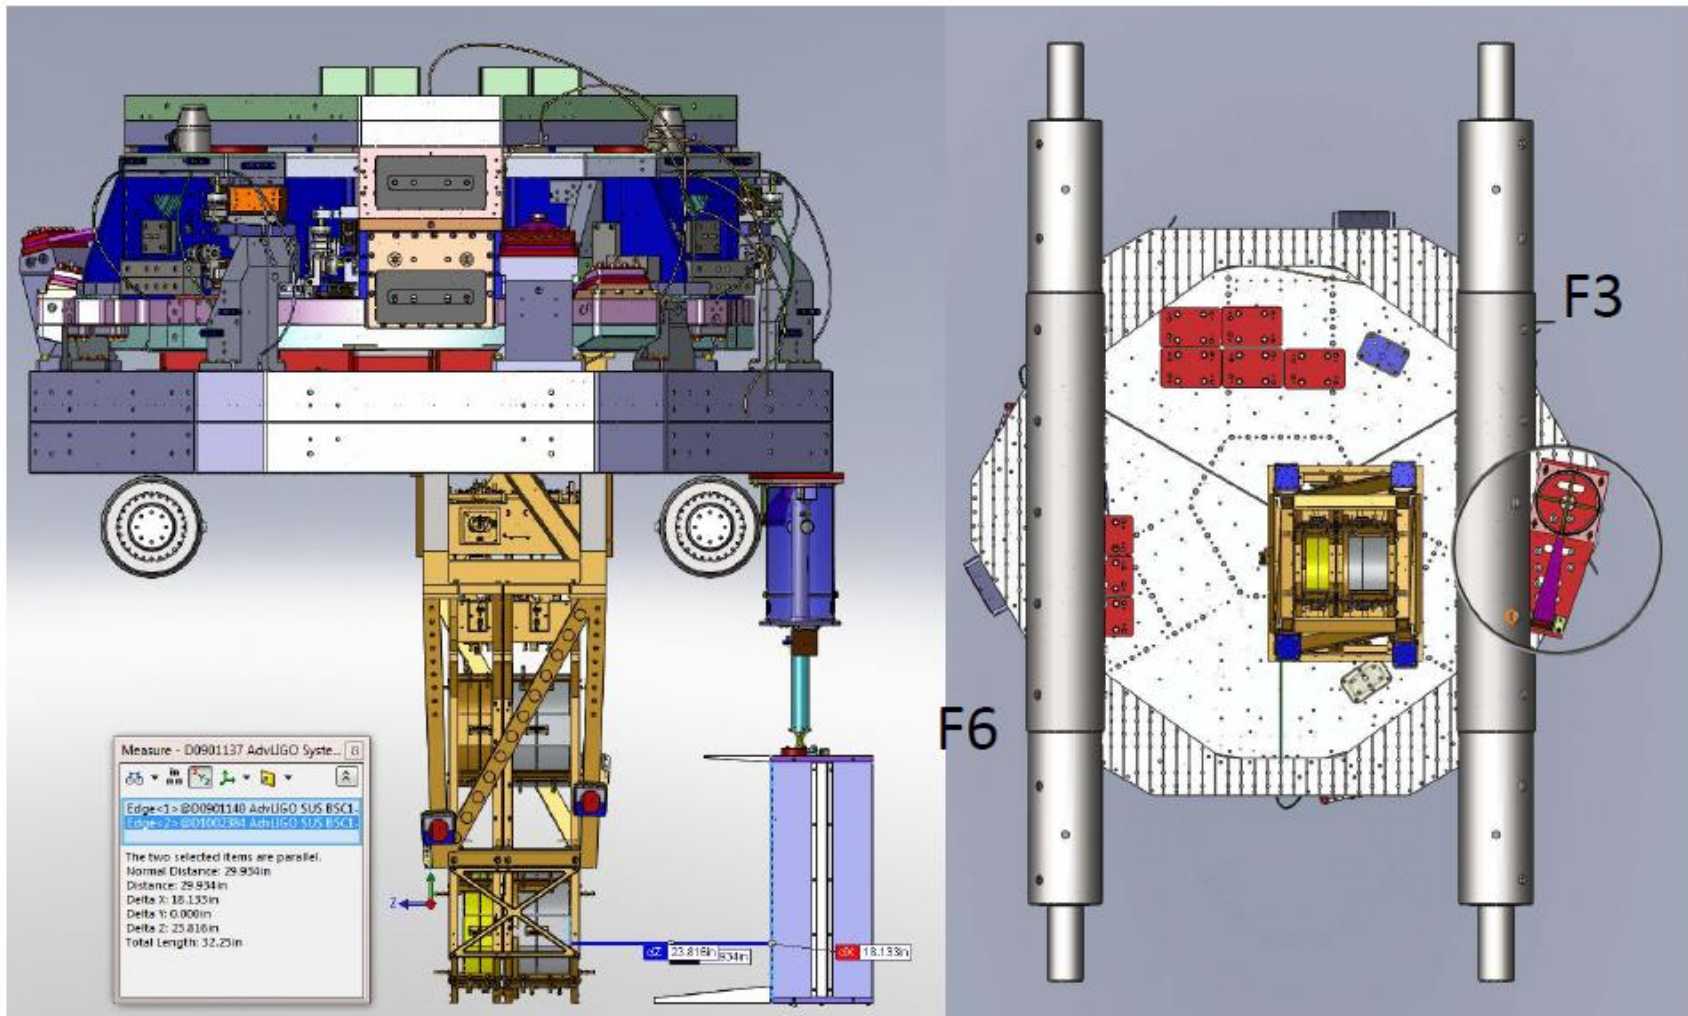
Clamping Detail for the ACB Top Mounting Plate
